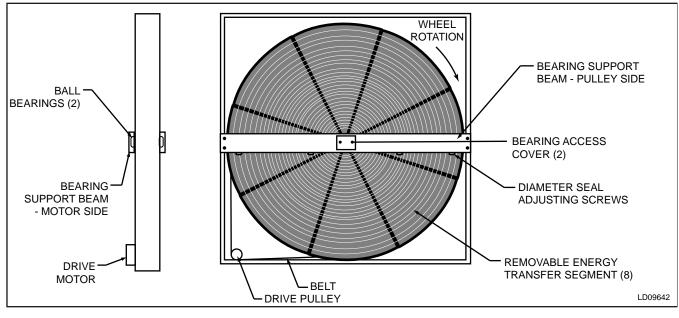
ENERGY RECOVERY WHEEL, BEARING SUPPORT BEAM SIDE
